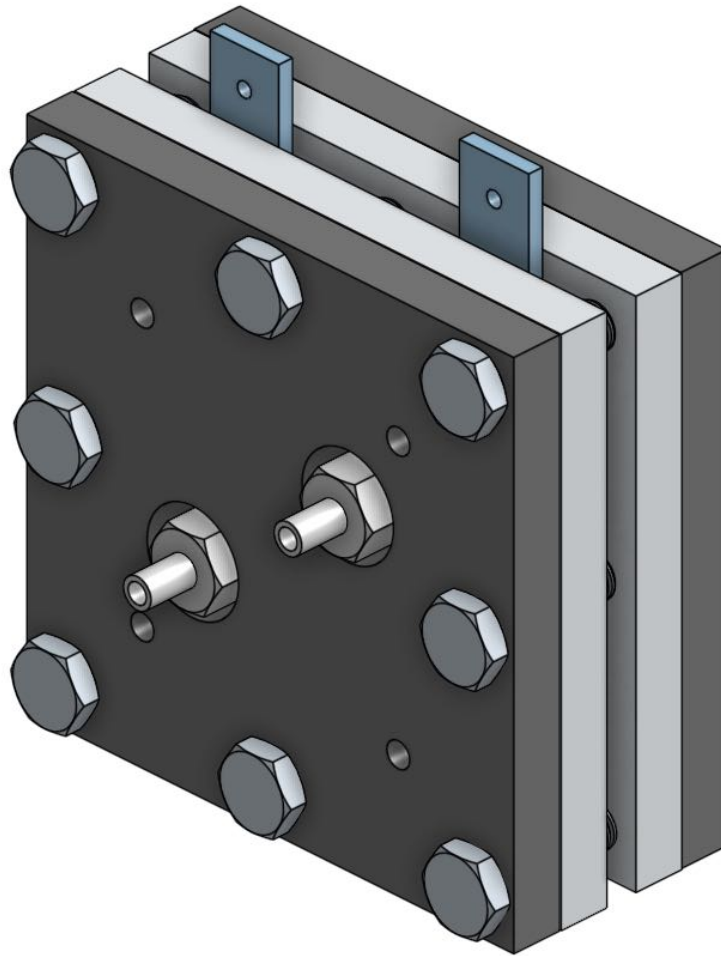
Attaching the four tube fittings into four PTFE insulating plate.
